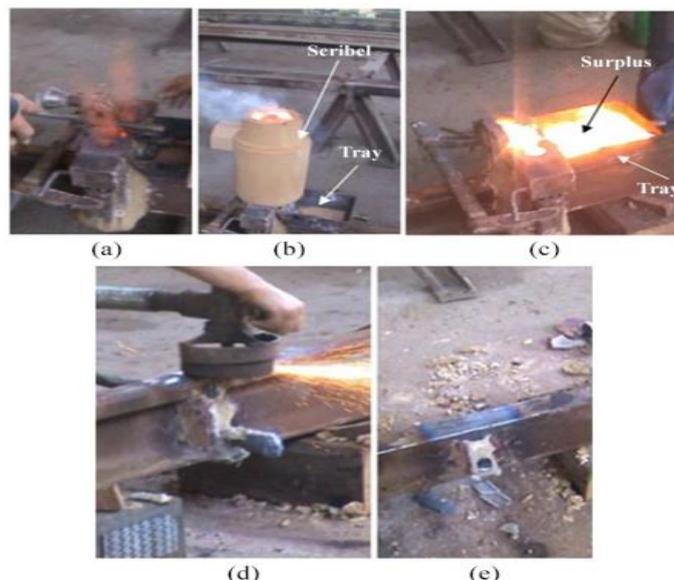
Steps to execute a thermite weld: (a) preheating, (b) outbreak of thermite reaction, (c) solidification, (d) grinding and (e) finishing [17],[19].
